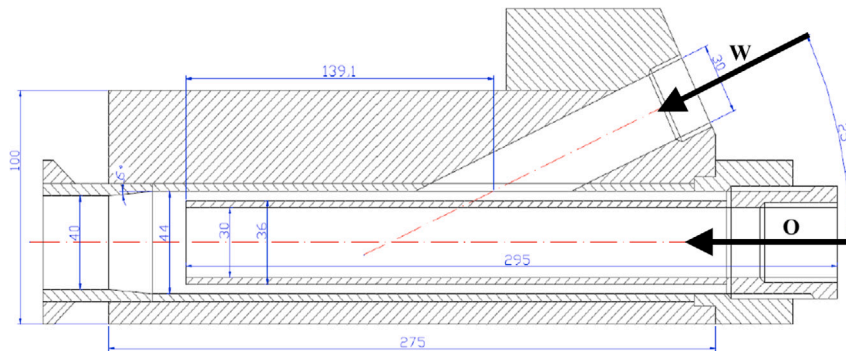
Oil-water injector technical drawing. Lengths in mm and angles in degrees.
